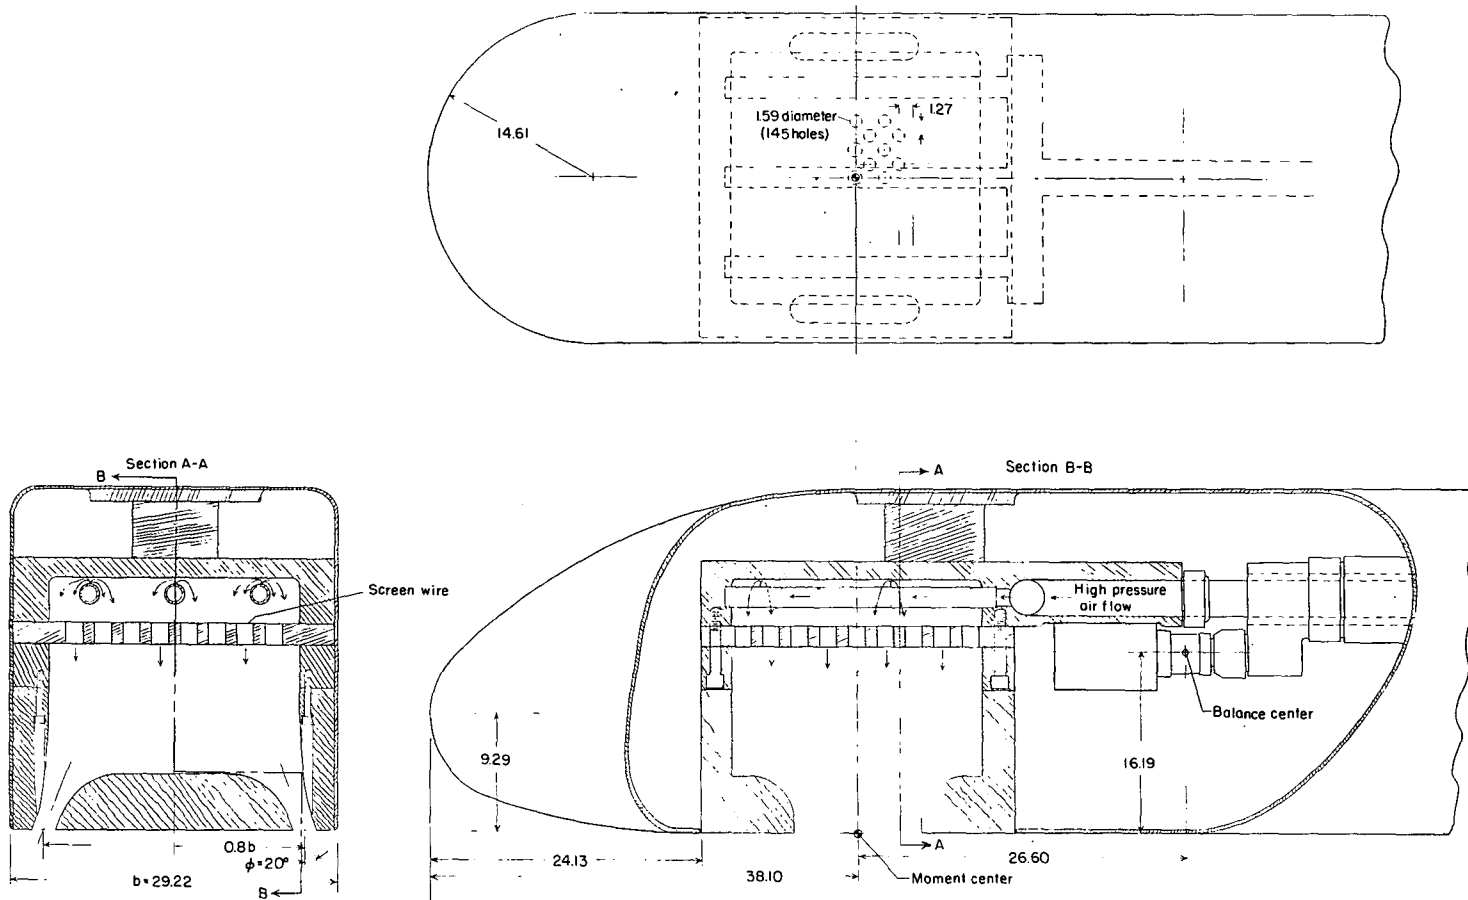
Sketch showing balance, air-line system, and details of a typical nozzle installation. Dimensions are in centimeters.
